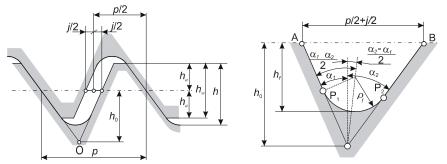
A geometrical model of the calculation profile of the face-gear done with a disc tool, a) calculation profiles of two face gear in nominal meshing b) increased profile of the tooth root [3]
